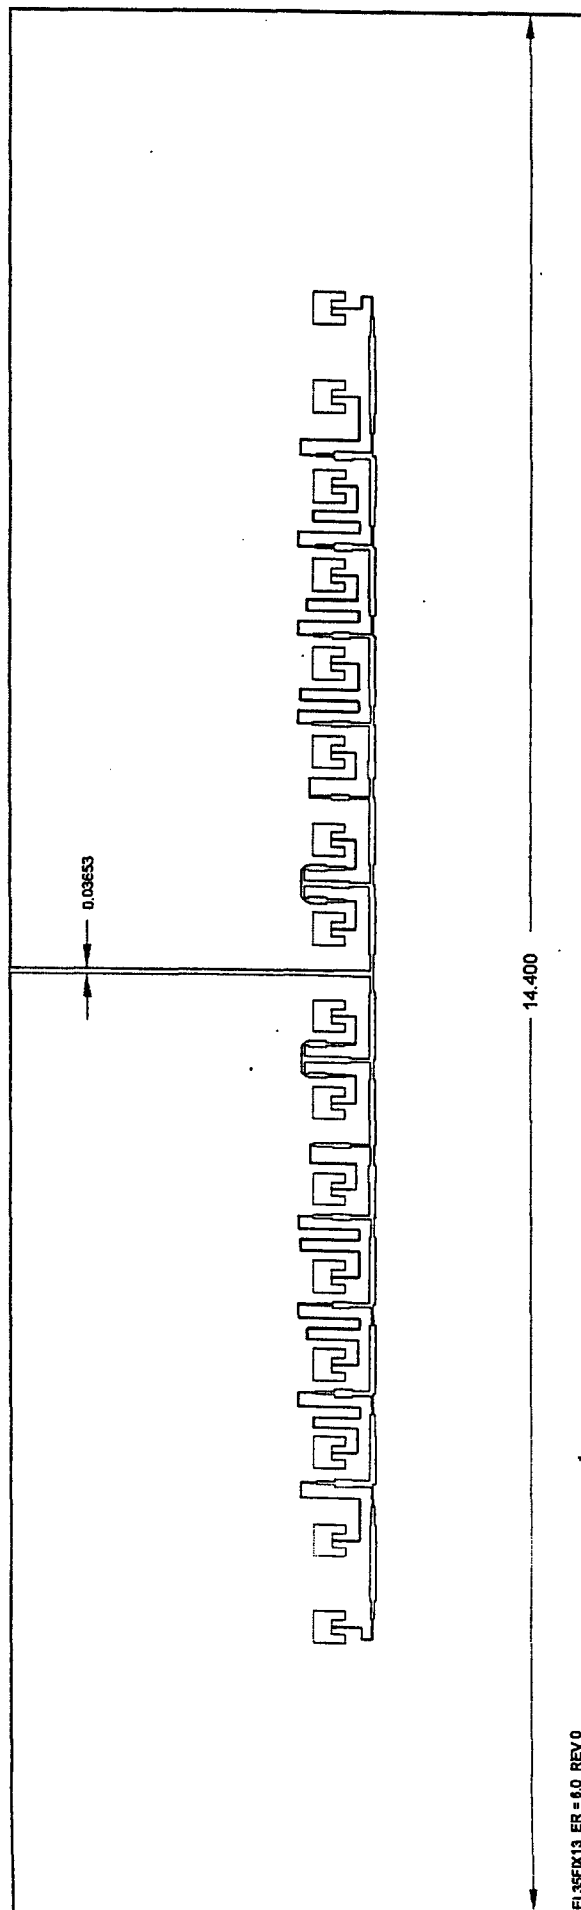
TMM-6 Board - Full Elevation Feed and Microstrip Patches
